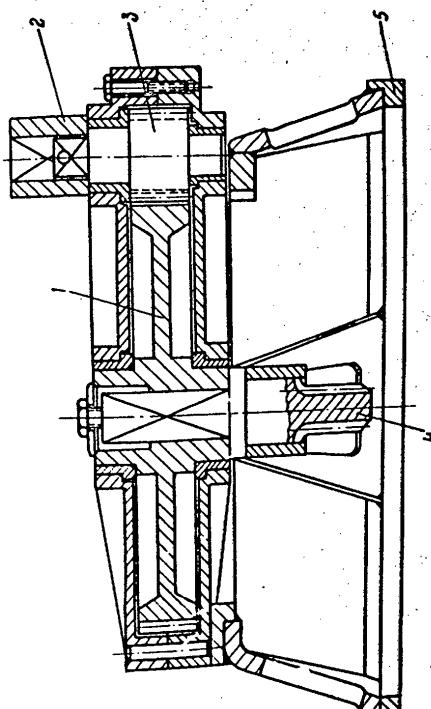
REDUCTION GEAR FOR MASTERS ROD CHUCKING END
